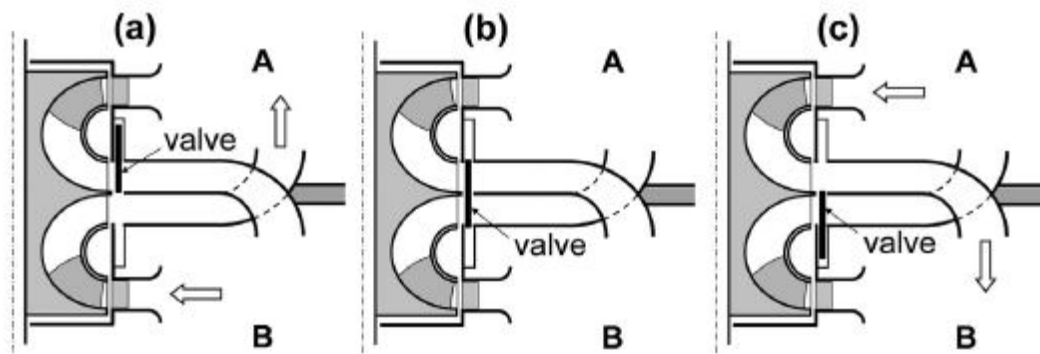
Three-position axially-sliding valve in the twin-rotor turbine [57]
